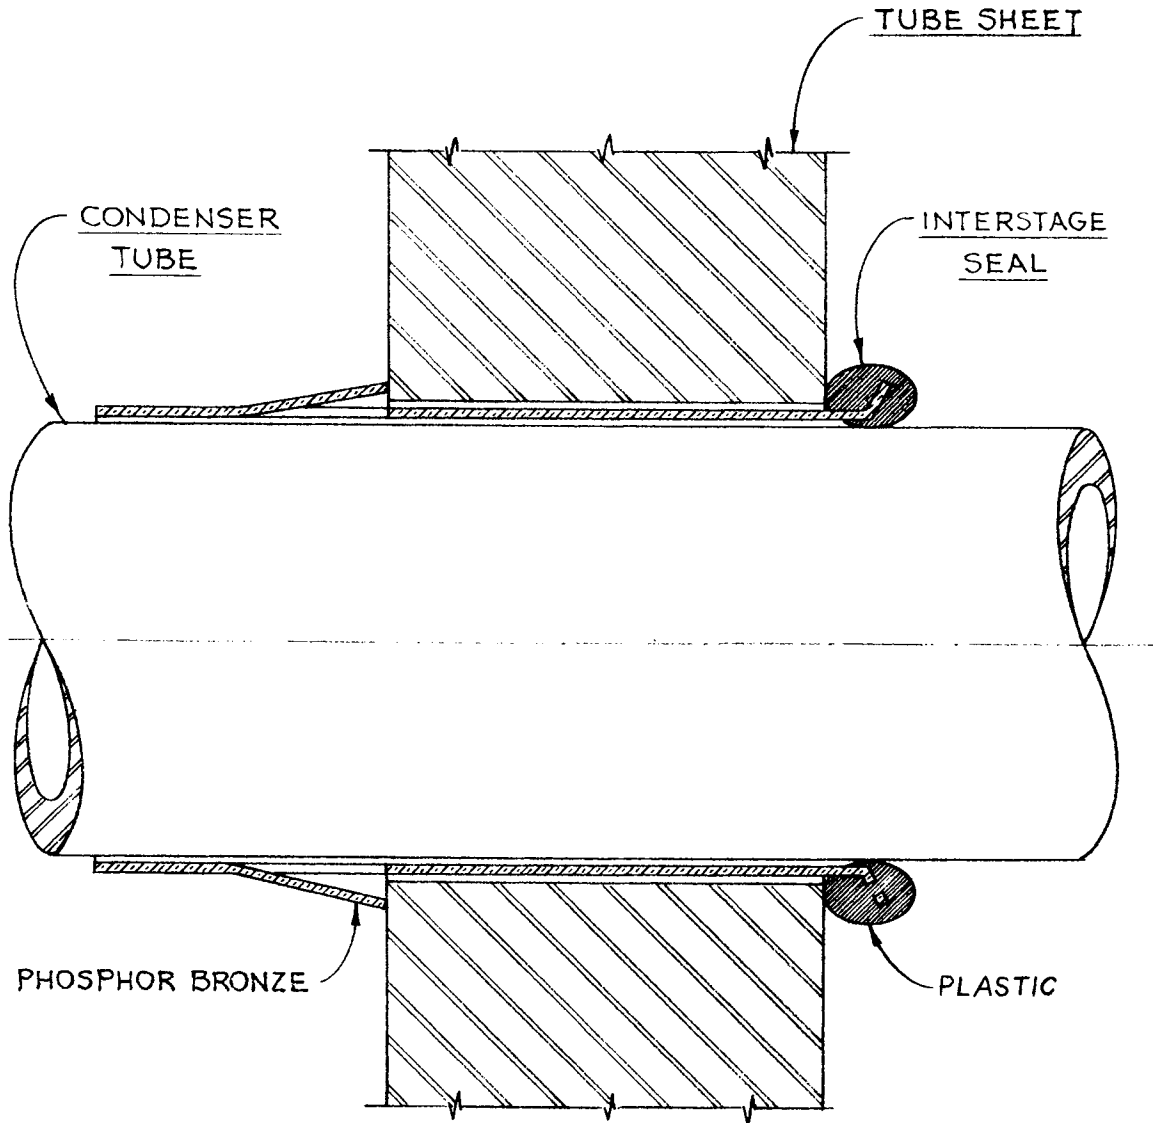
Seal Design 2A. Tube diameter, 0.750 in.; hole diameter, 0.875 in.
